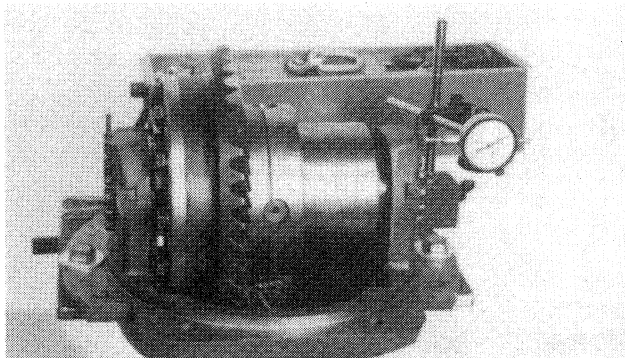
Use a dial indicator to measure deflection of carrier housing when adjusting differential carrier bearing preload. Refer to text.
